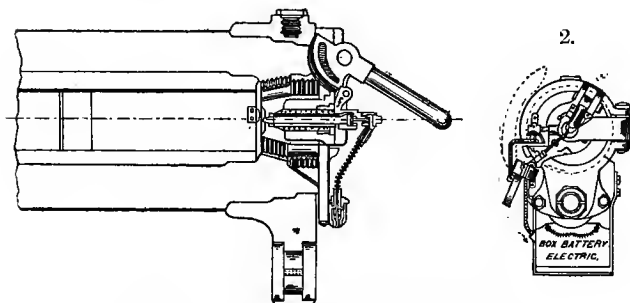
4.7-INCH QUICK-FIRING GUN.
